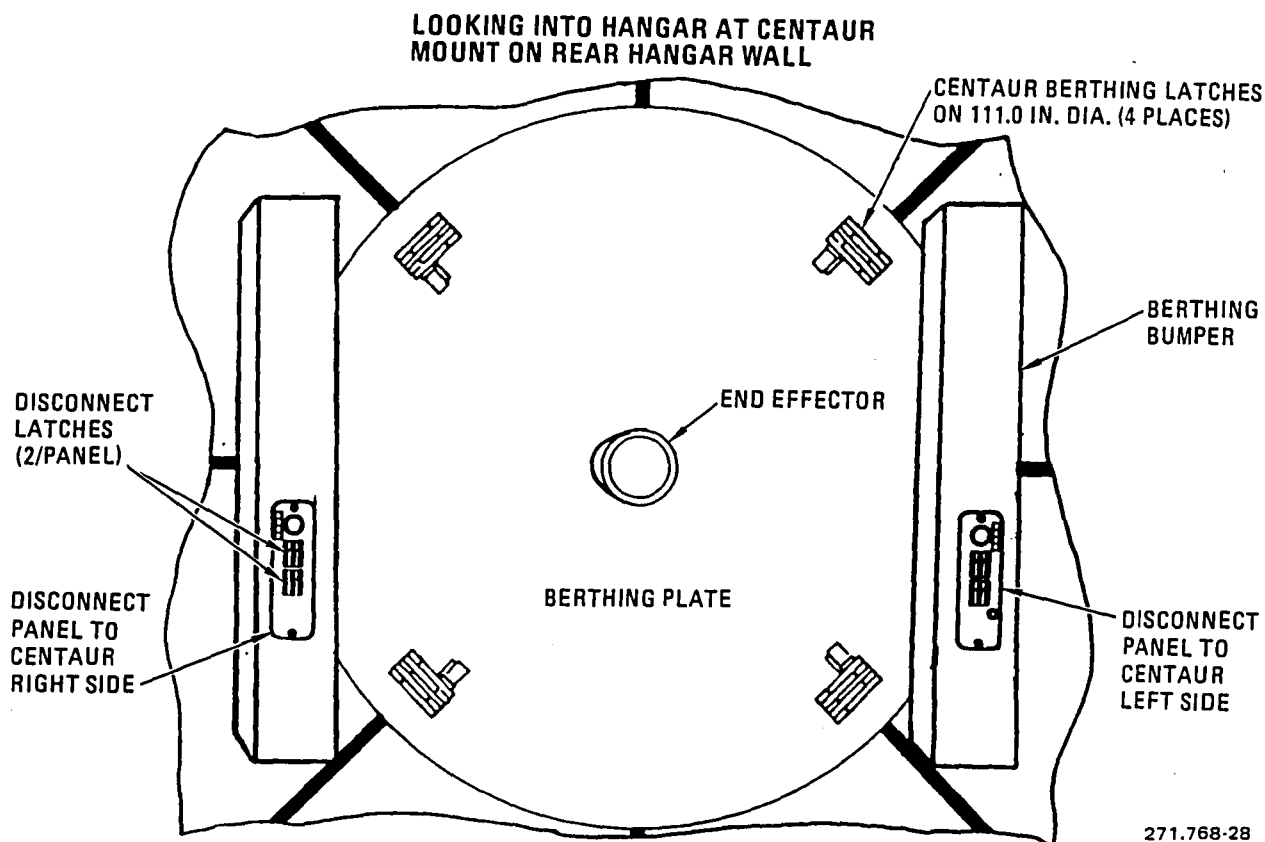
Rear Hangar Wall Details Show Berthing and Service Connections
